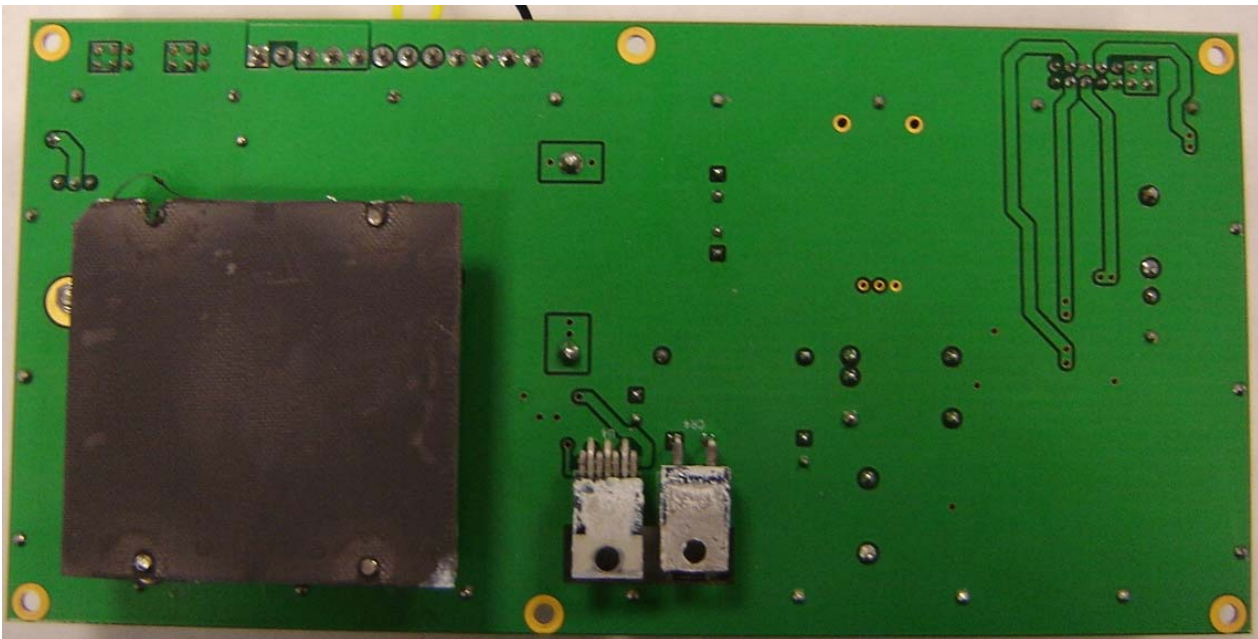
Power Supply PCBA 902-P071-01B Bottom
